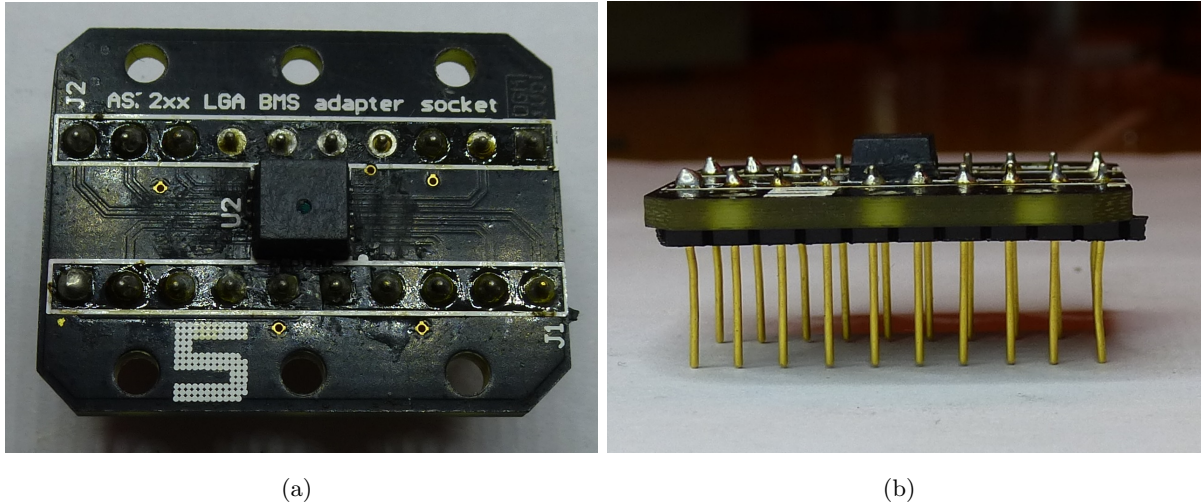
Measurement construction for the OLGA package. (a) Top view: the small rectangular package in the middle soldered onto a printed circuit board, (b) side view
